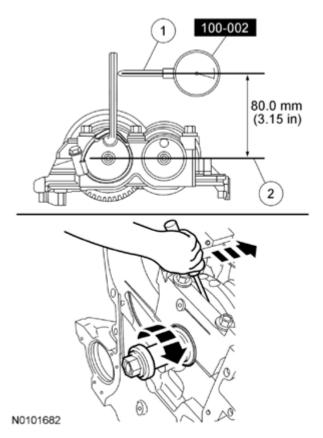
Measuring Gear Backlash Using Dial Indicator Gauge Courtesy of FORD MOTOR CO.
